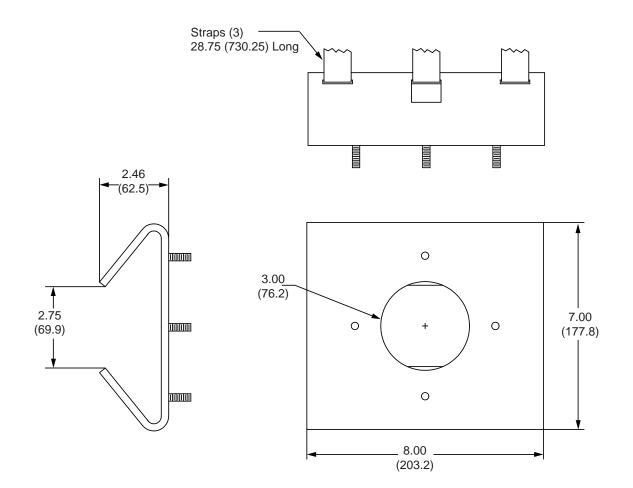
Dimensions, Pole Mount. Dimensions in inches (mm) (CohuHD p/n 7411408-001)
